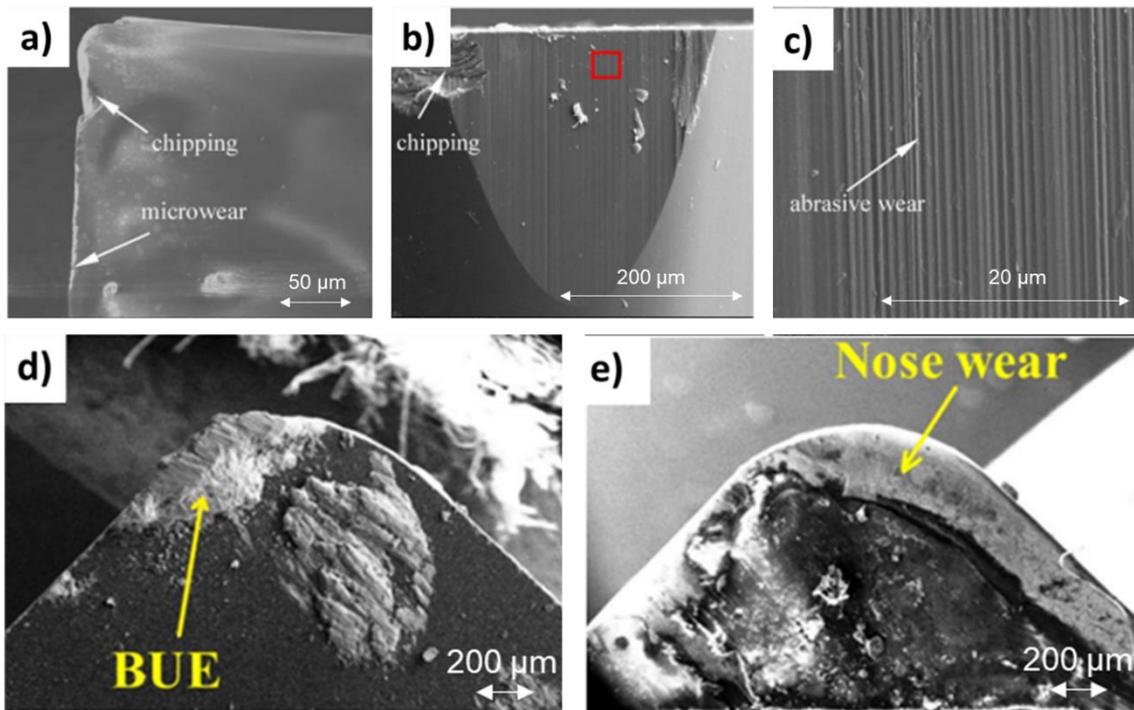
Micrographs of 2009Al/ 15 vol.% SiC showing the tool wear in the round edge SCD (a) flank face (b) flank face on tool nose (c) higher magnification of rectangle in (b) showing abrasive wear, (d) BUE formation in the PCD tool, (e) tool nose wear in the PCD tool (Adapted from Yingfei *et al.*, 2010 and Pugazhenthii *et al.*, 2018)
